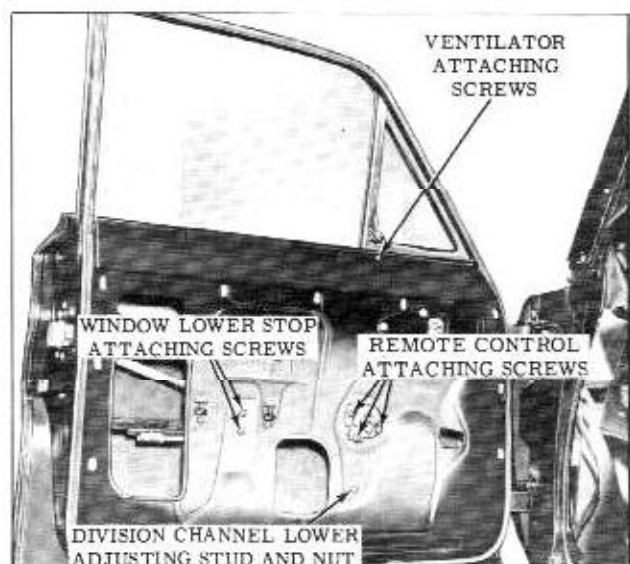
Front Door Ventilator and Remote Control Attachment
